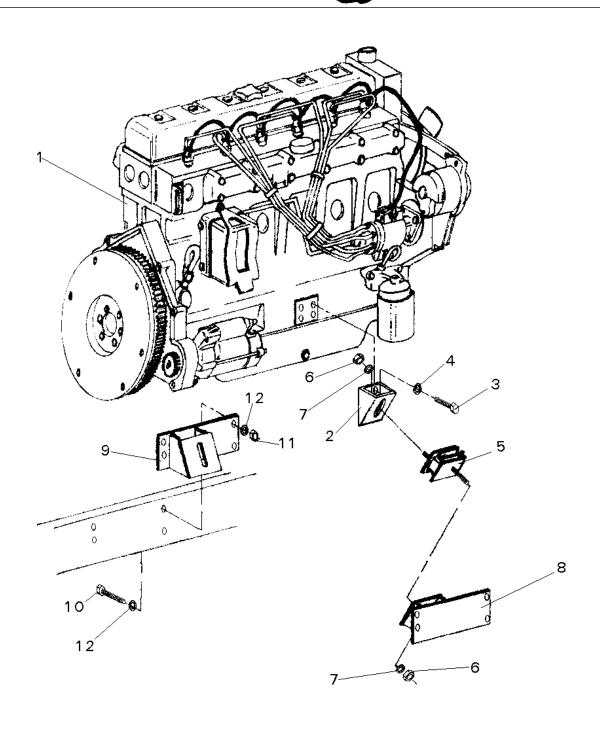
Engine and Engine Mounts Installation - Cummins/Onan Engine
